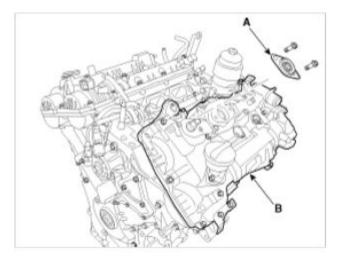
Identifying CVVT Oil Control Valve Cap And LH Cylinder Head Cover Courtesy of HYUNDAI MOTOR AMERICA
